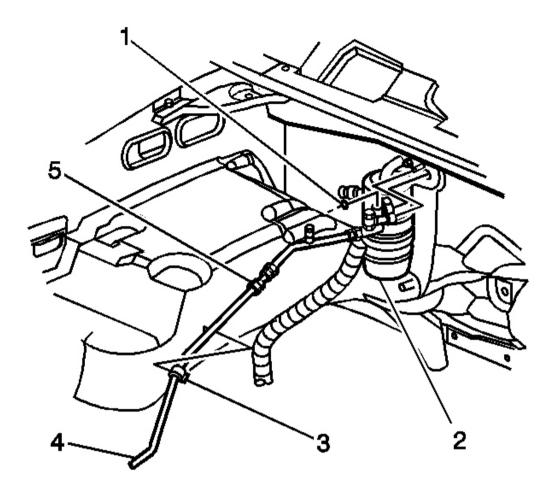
A/C Refrigerant Filter & Evaporator Tube Courtesy of GENERAL MOTORS CORP.
